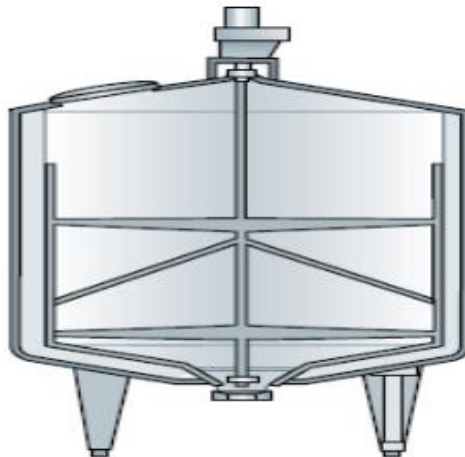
Mixing tank with welded-on heating/cooling channels
